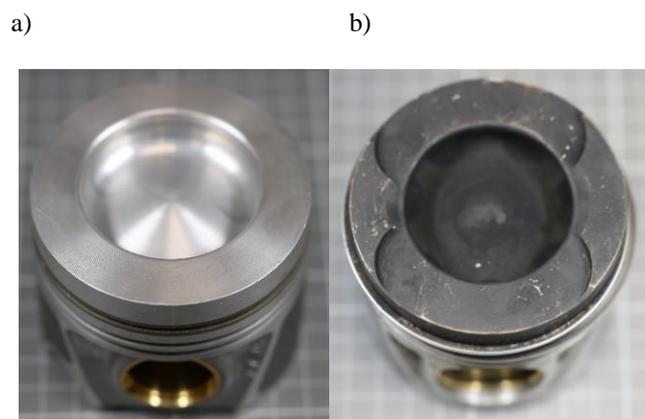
Piston crown with combustion chamber: a) new diesel engine piston, b) piston after approximately 200,000 kilometers of operation
